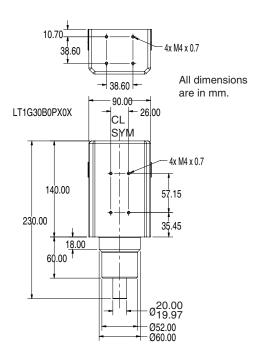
LT1 (Theta) Module Envelope/Mounting Hole Dimensions (Top View)
